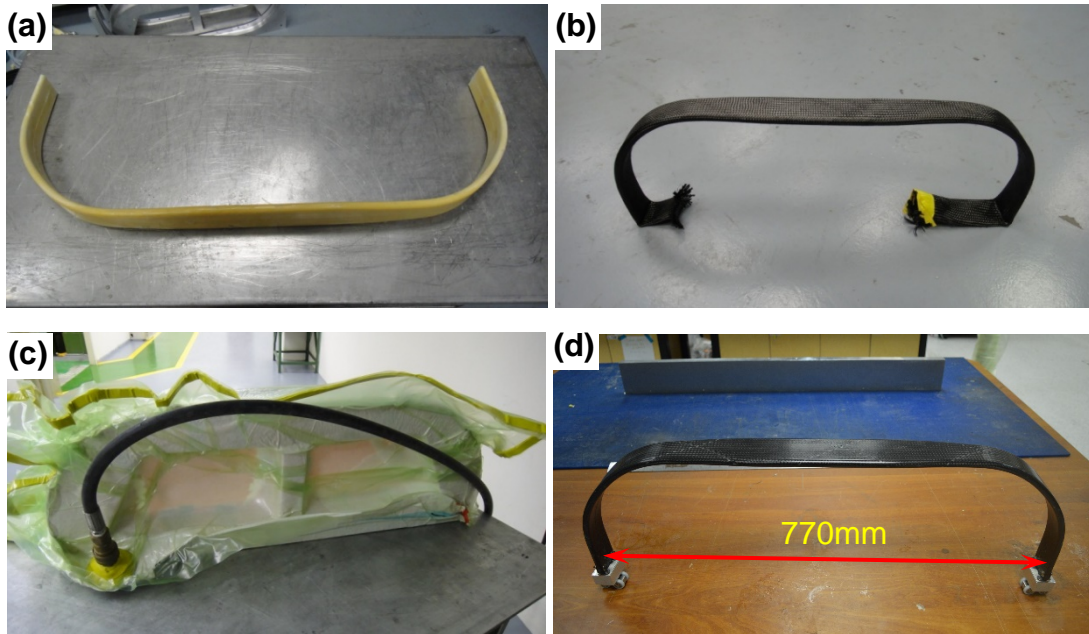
Fabrication of the landing gear structure: (a) foam core; (b) foam core wrapped by A-42 carbon fiber sleeves; (c) vacuum bag assembly which includes the landing gear and the aluminum mold; (d) fabricated landing gear structure.
